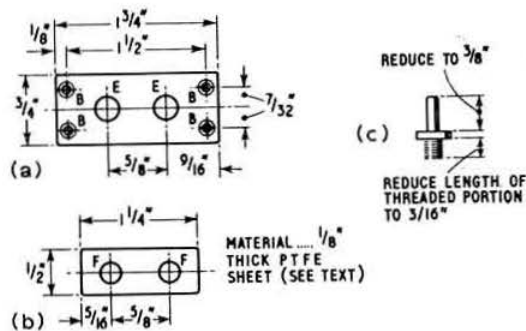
Left, top, coil socket; bottom, coil plug base. Right, modifications to OZ plugs required for range D
